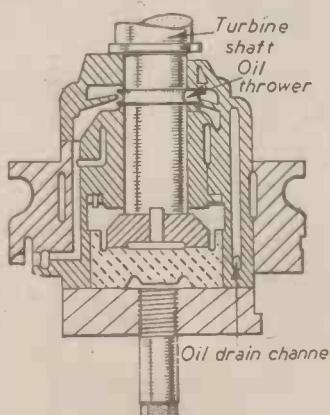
(left). Section through the step bearing of a Curtis turbine.
